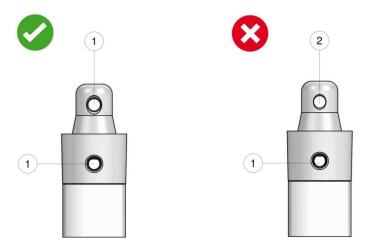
Holes in LITEC end-plated conical connectors. 1: Large hole. 2: Small hole.
